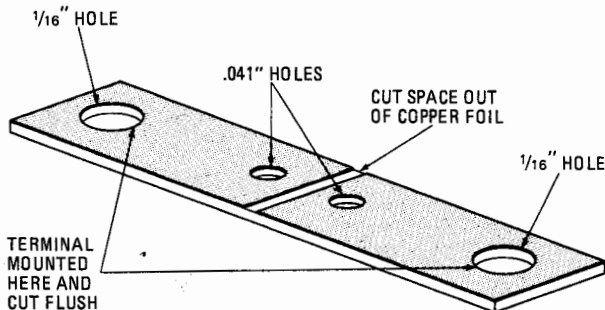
LED MOUNTING STRIP made from a small piece of single-sided printed-circuit board. Mini-terminals fit the outer holes.
